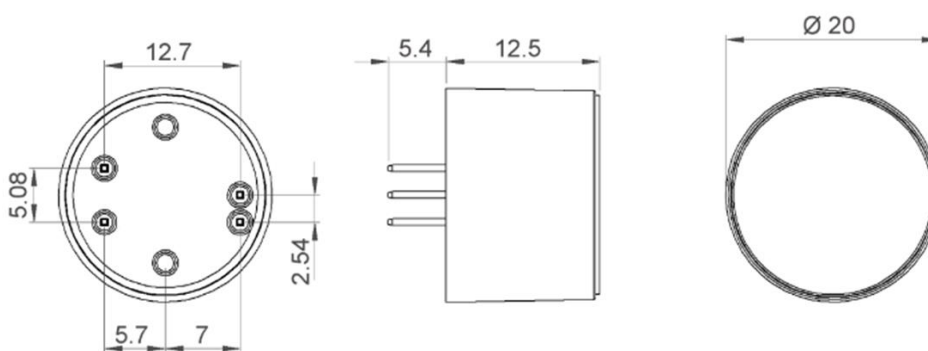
Appearance dimension drawing (unit: mm , general tolerance: ISO2768-mK)
